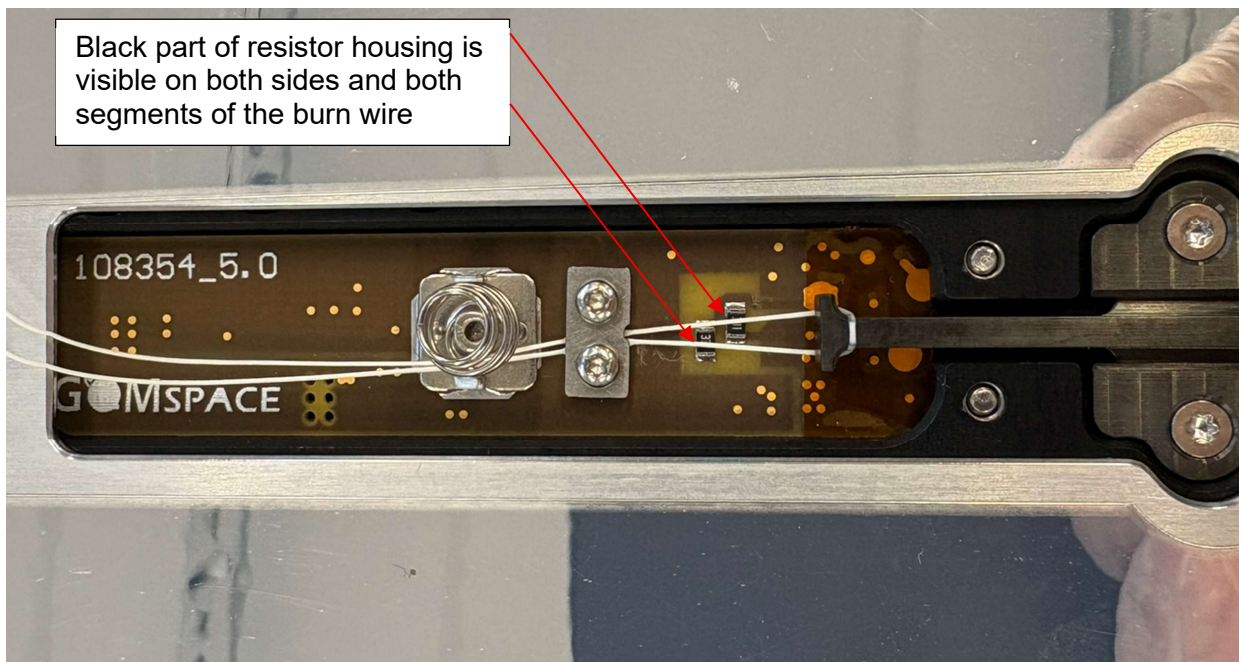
Burn Wire Tighten and adjusted to be above the resistors and Final torqued.
